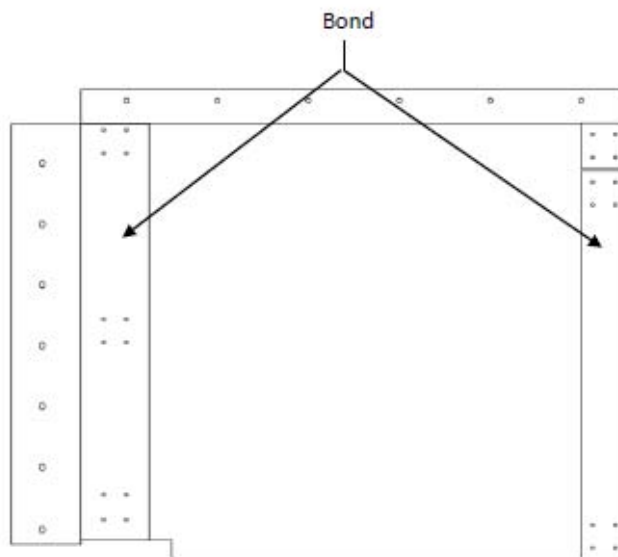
Front view – Adhesive Bonding of the Barrier continued
